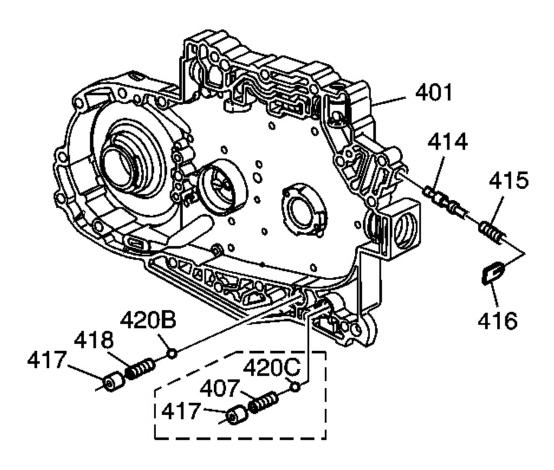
Expanded View Of Case Cover Components Courtesy of GENERAL MOTORS CORP.
